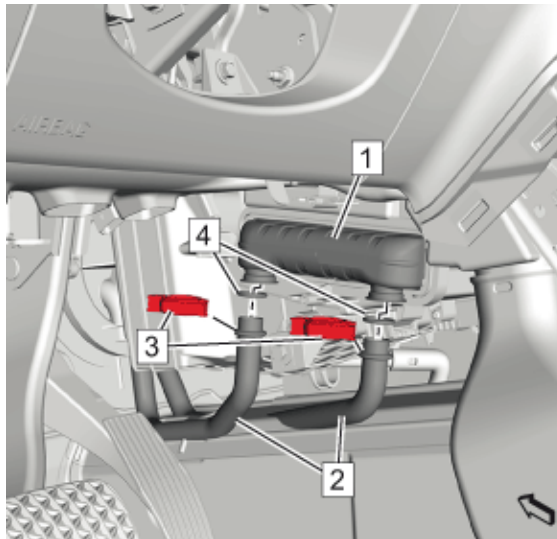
Heater Core, Clamps, Tubes And Sealing Rings
